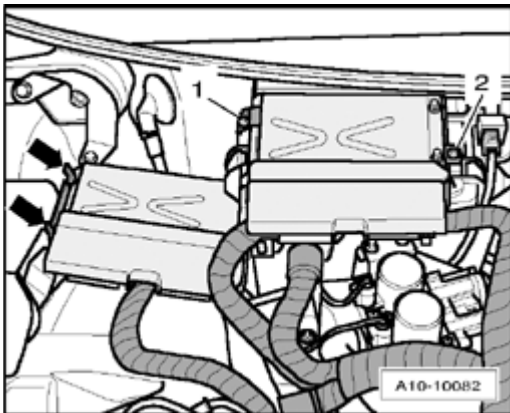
Retaining Bracket Bolts & Retaining Tabs
